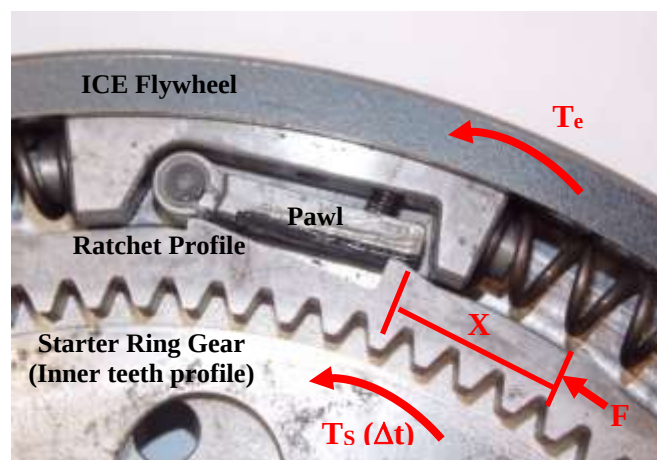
Pawl-ratchet OWC. Dimension “X” is the max. travel distance of the pawl during engagement
